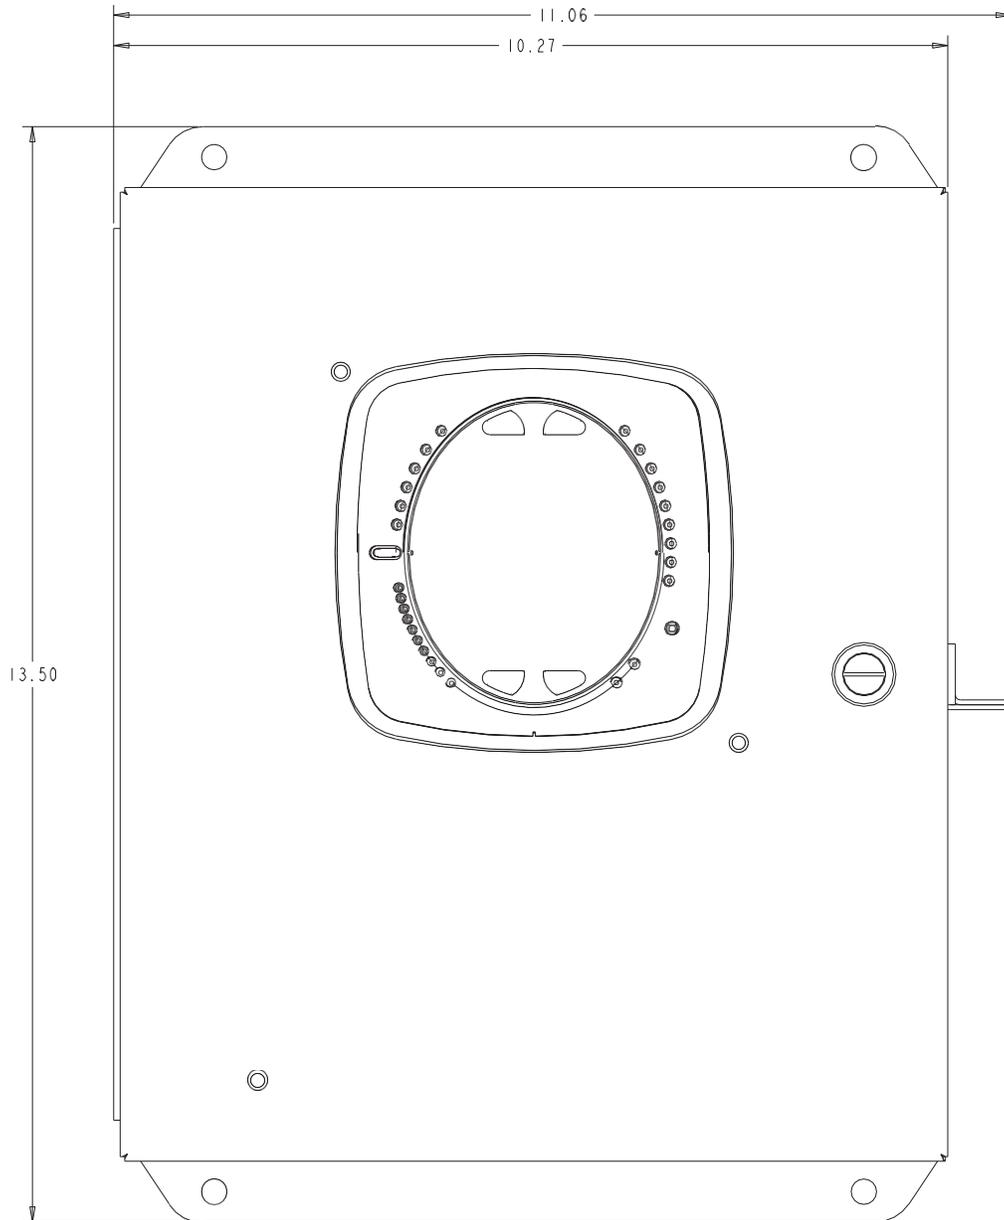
NEMA 1 Enclosure Front Dimensions
